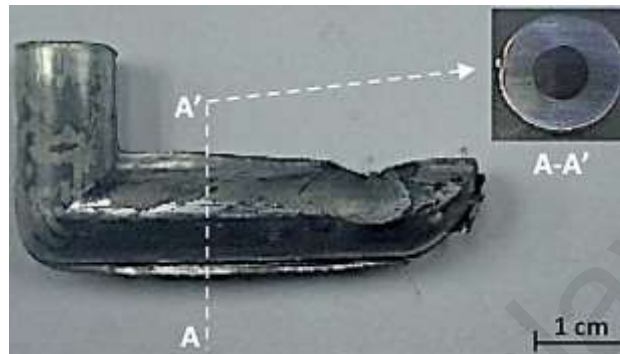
Overall and cross sectional views of the workpiece after ECAE joining
